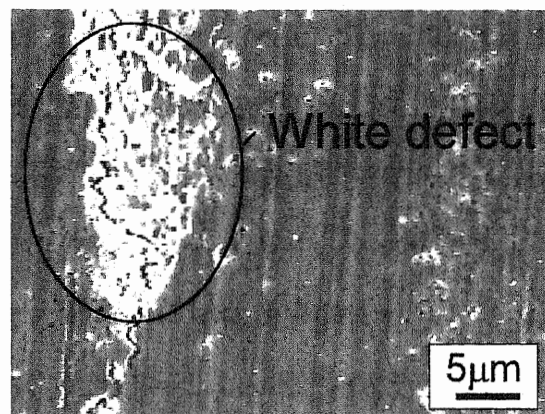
Machined surface at high magnification using cemented carbide tool K10.
